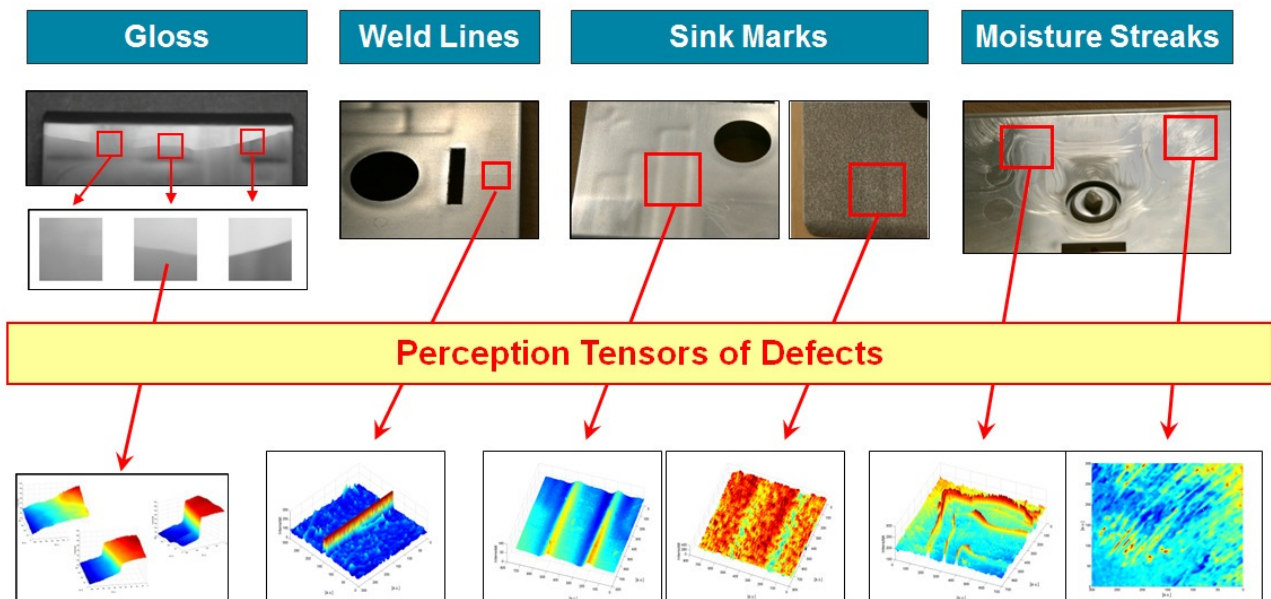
Selection of characterized surface defect types at an injection molded test parts
